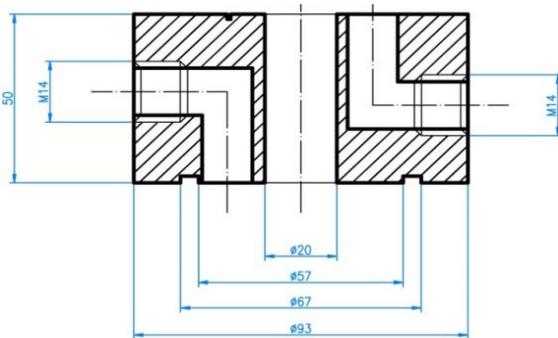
Adapter piece with cross-section view for fixing oil filter
